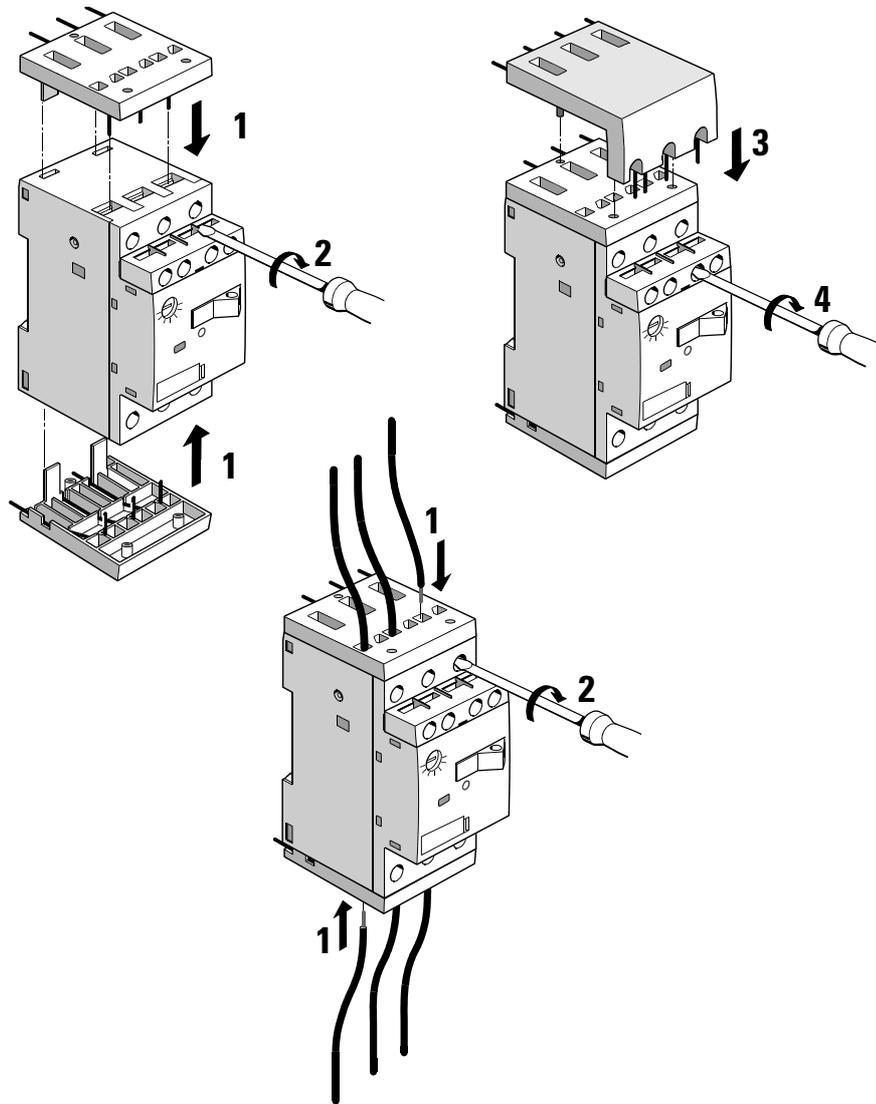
Circuit breaker/MSP, soldering pin connector (frame size S00)
